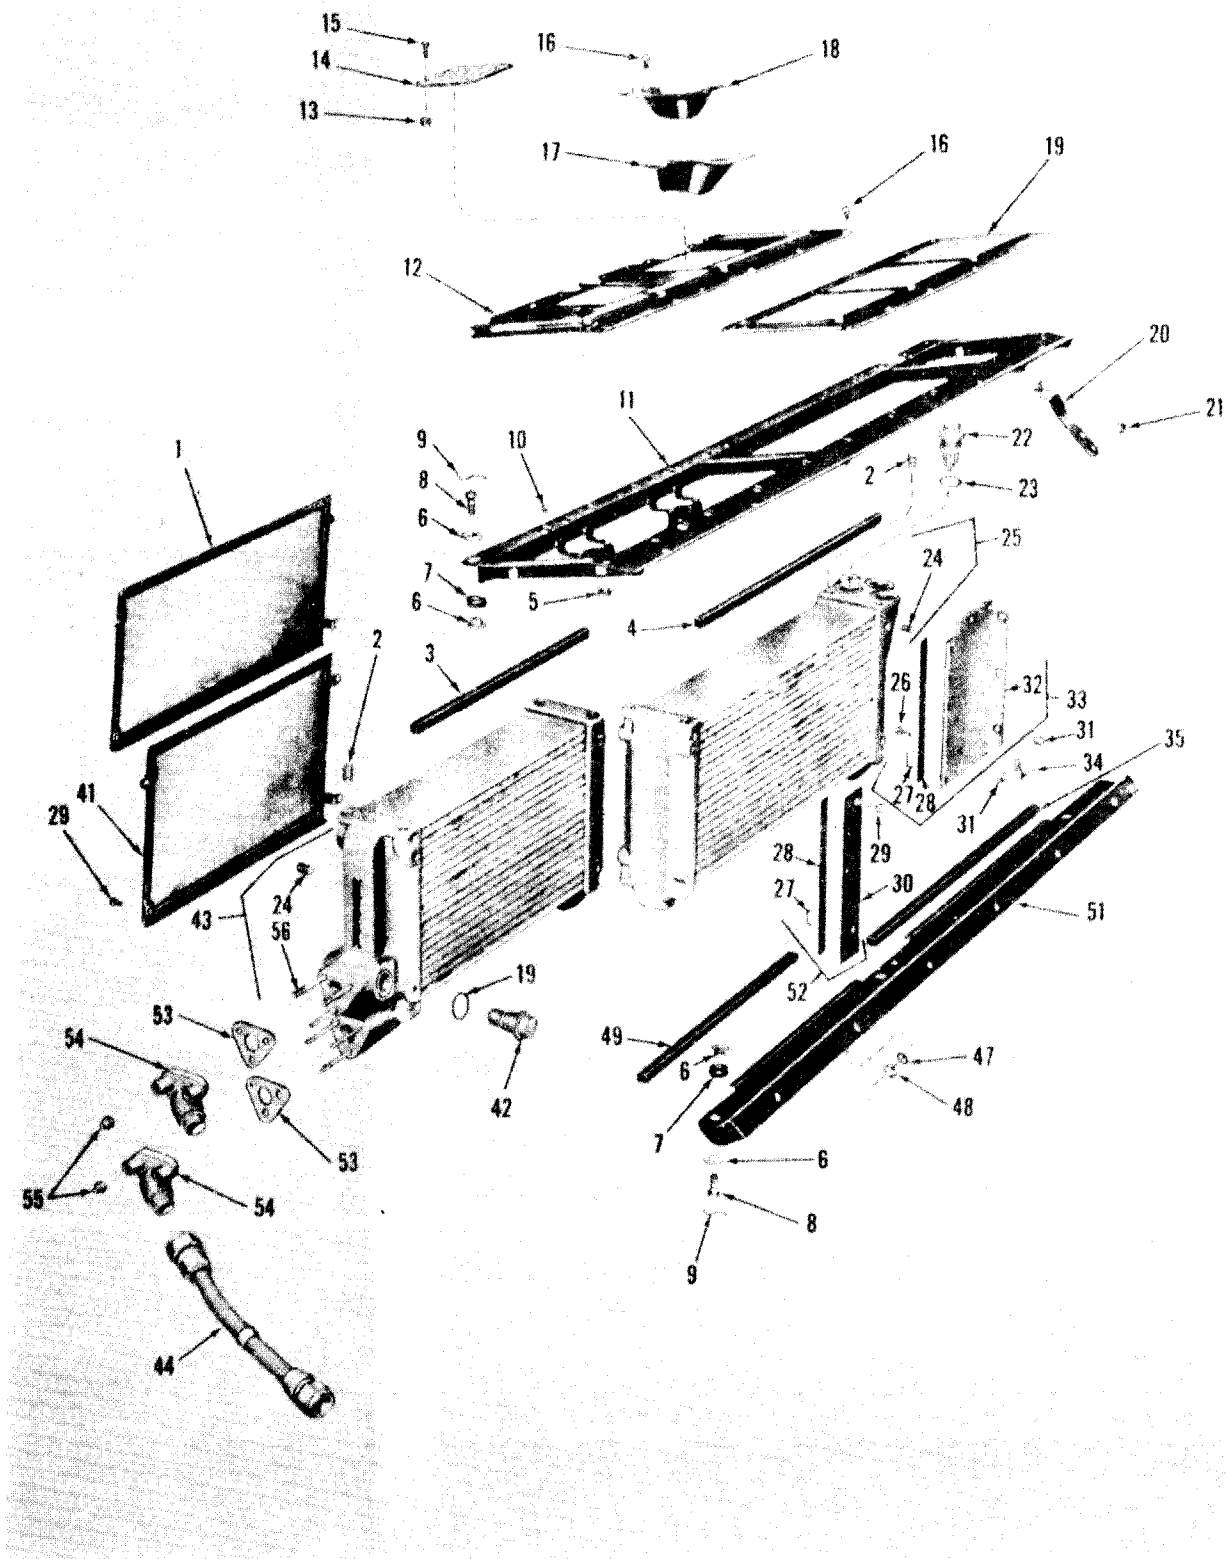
Radiators, Shrouds and Associated Parts—Exploded View.
